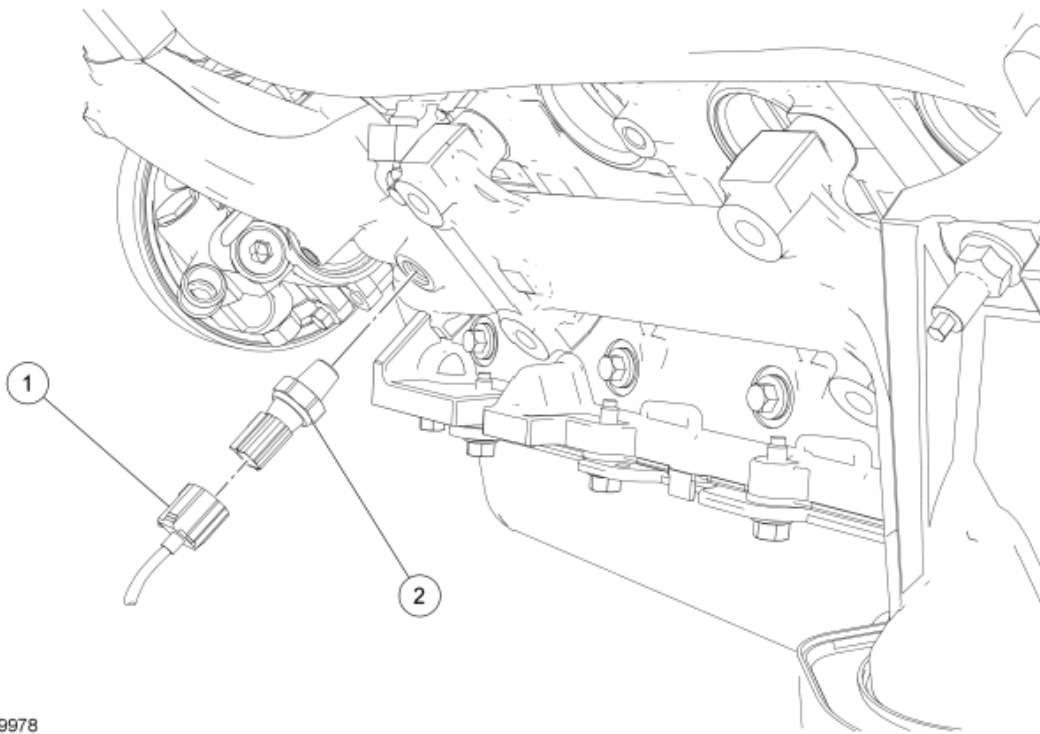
Identifying Engine Oil Pressure Switch Electrical Connector And EOP Switch
